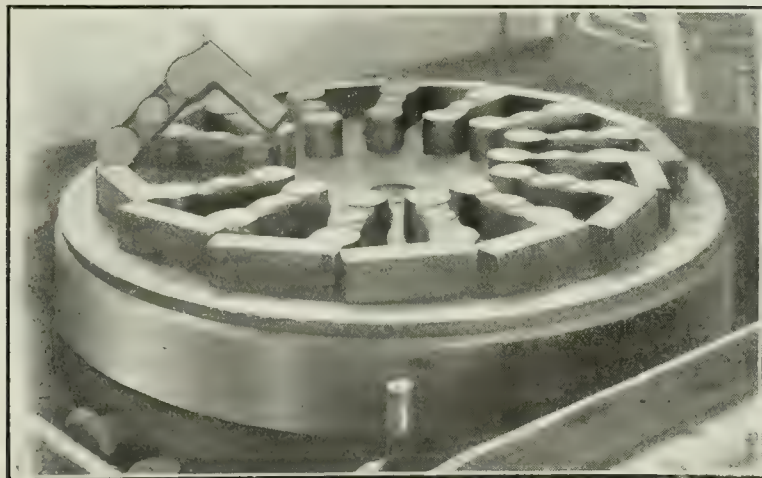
GRINDING SOME CAST IRON BRACKETS.
